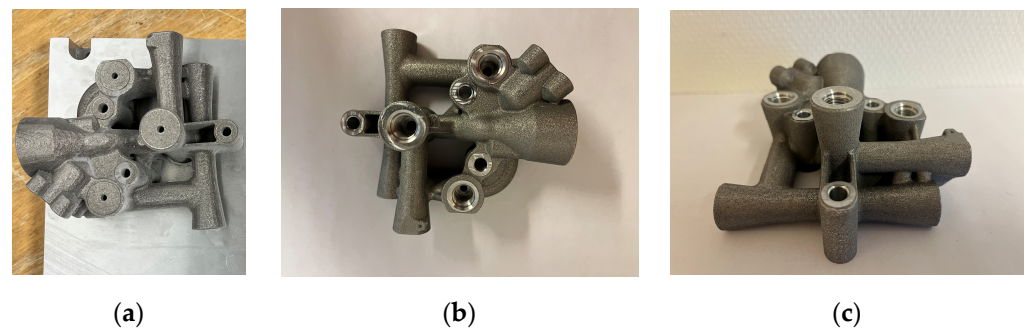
Manifold after printing: (a) before drilling; manifold after machining and postprocessing heat treatment; (b) thread detail (top); (c) plugs threads detail (front).
